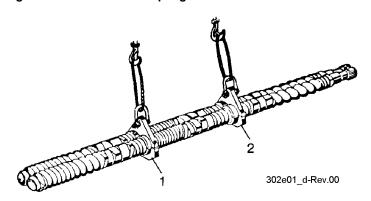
Transporting screw shafts up to a length of 12 screw barrels
